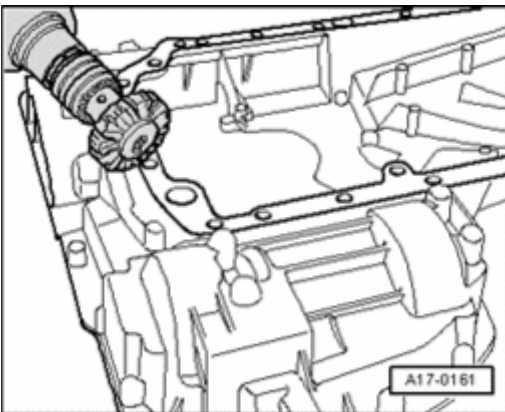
Using Rotating Plastic Brush To Remove Remaining Sealant From Oil Pan (Upper Part) And
